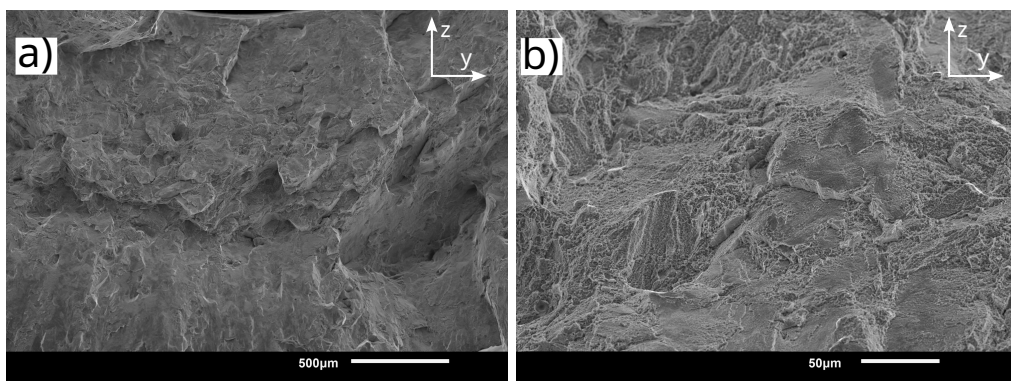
Fracture surface of AM-HT samples tested in air showing ductile failure. a) overview b) Micro Voids.
